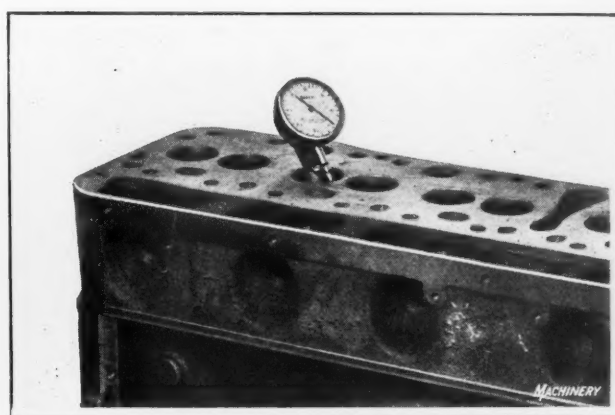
Inspecting the Concentricity of Valve Seats in the Cylinder Head Relative to the Valve Rod Guide Holes
